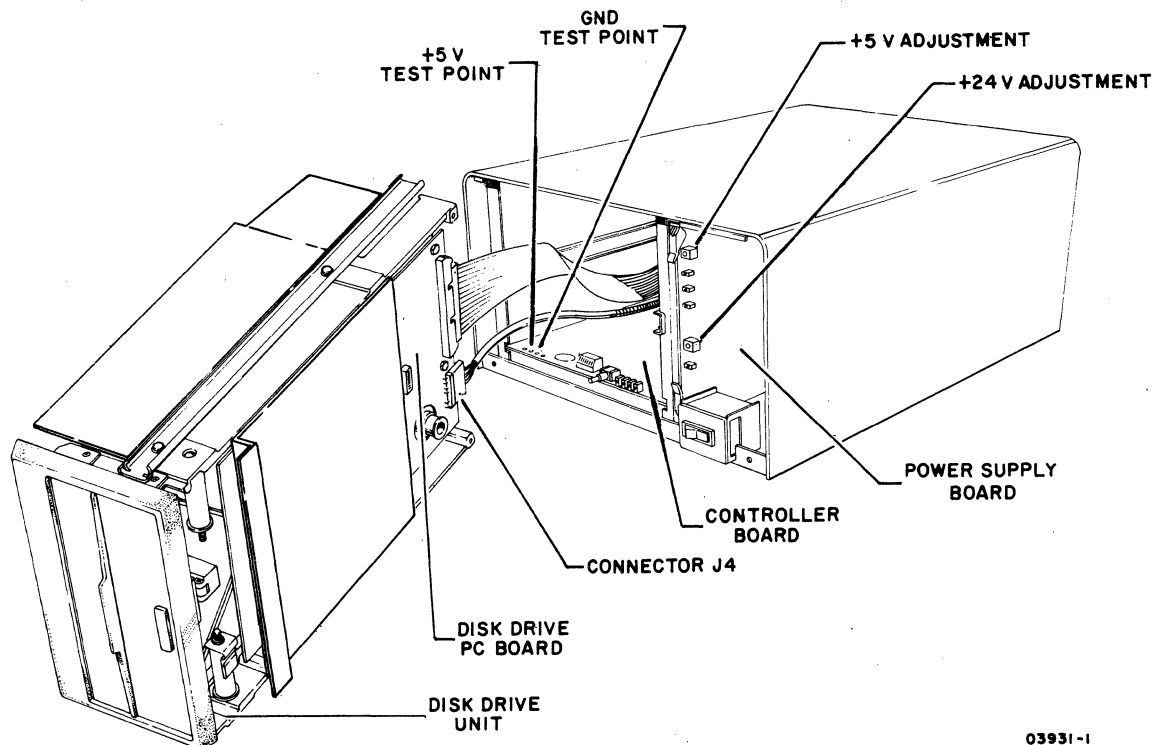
B-4.1. Controller Board Layout Model 9BED-4
